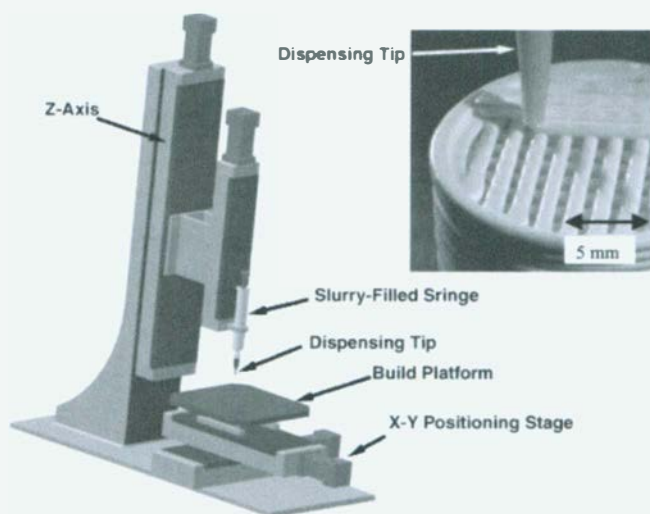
Schematic of a three-axis single material robocasting machine (Stuecker, Cesarano Iii, & Hirschfeld, 2003)
